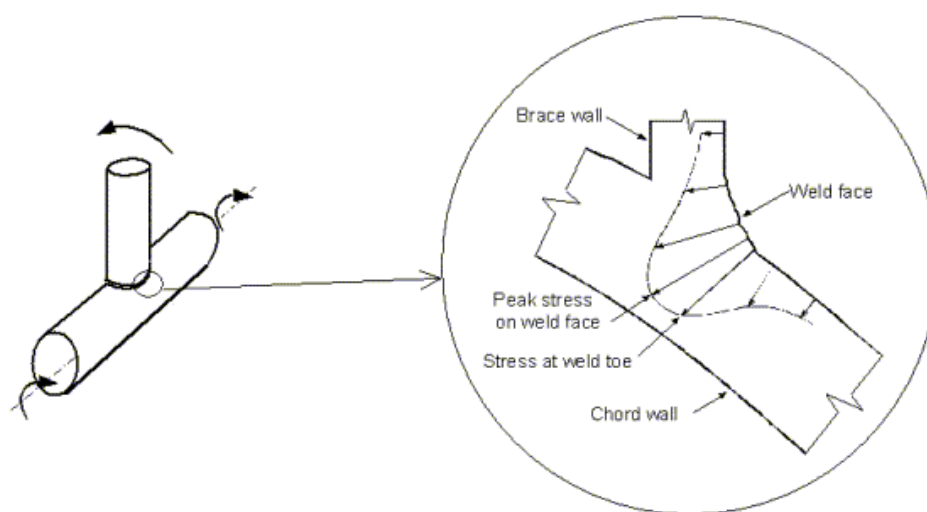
Stress distribution in a tubular joint (schematic), requiring grinding of the entire weld face and the weld toes in the brace and the chord.
